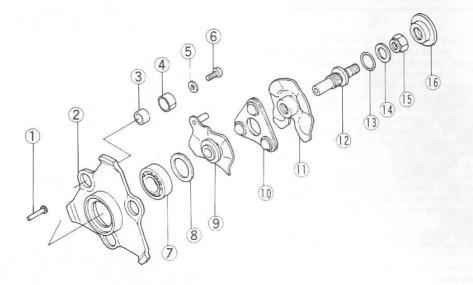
Clutch release mechanism - KLT110 (Sec 20)
